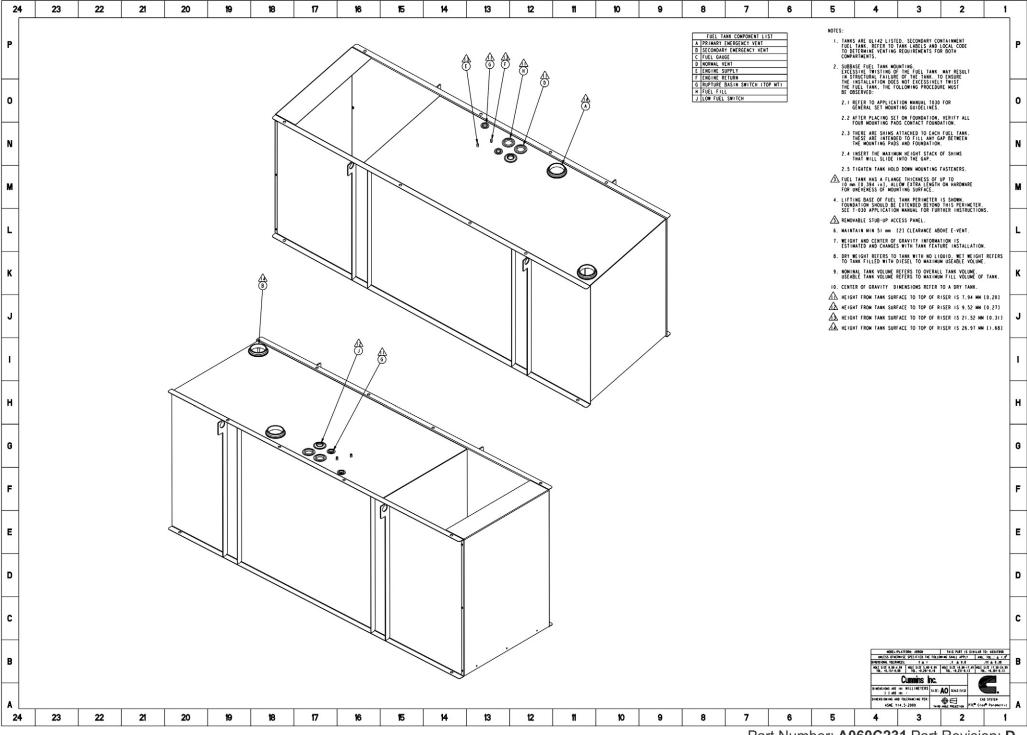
TANK OUTLINE DRAWING (SHEET 3 OF 4)
